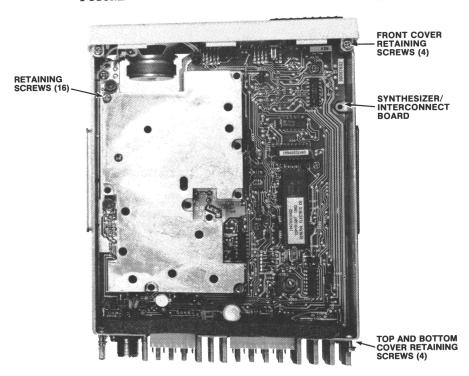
SYNTHESIZER/INTERCONNECT BOARD REMOVAL
